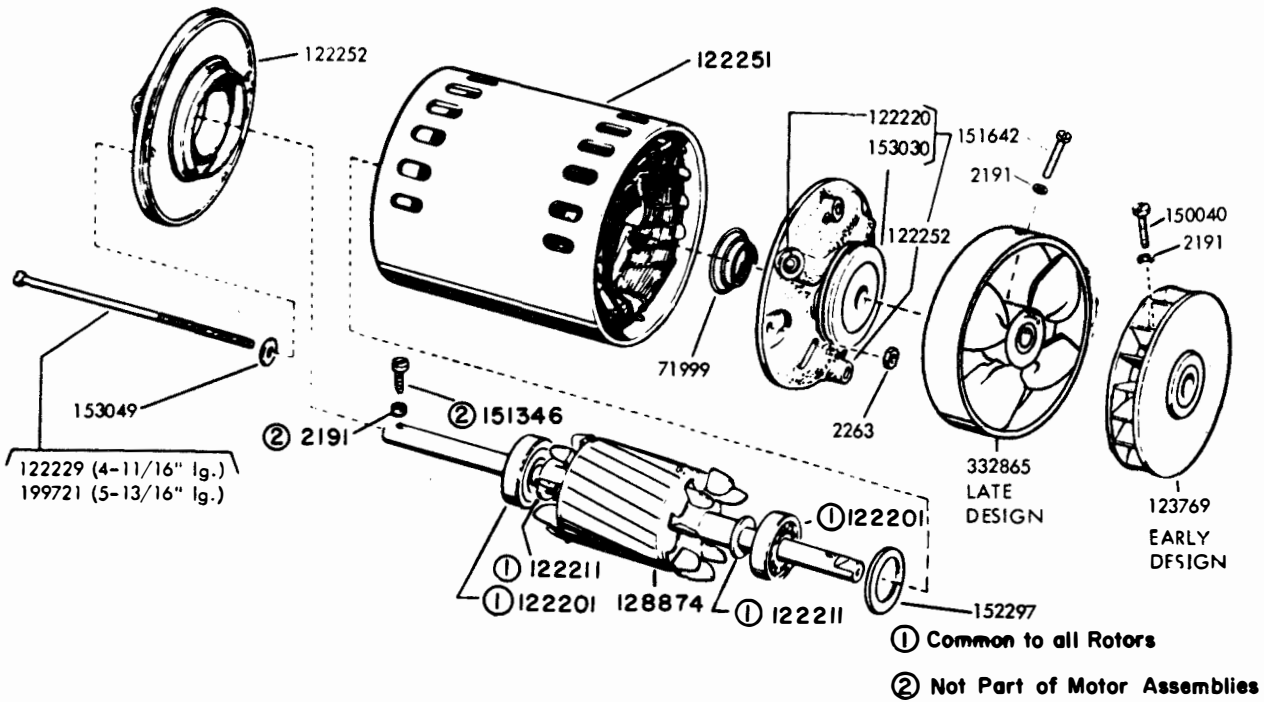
Synchronous Motor Assembly 151795 (Standard) - Used on LMU3 and LMU38
